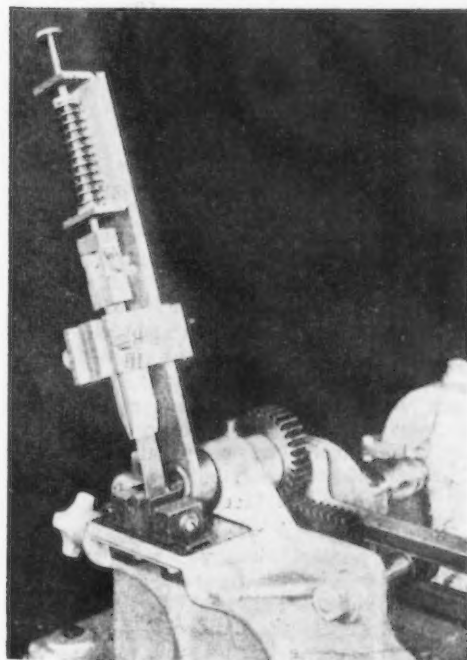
The Amsler testing machine repeatedly bends sheet metal samples at right angles over mandrels of different radii until the samples break. This test can be used to determine the minimum satisfactory bending radius for any gage or kind of metal.
